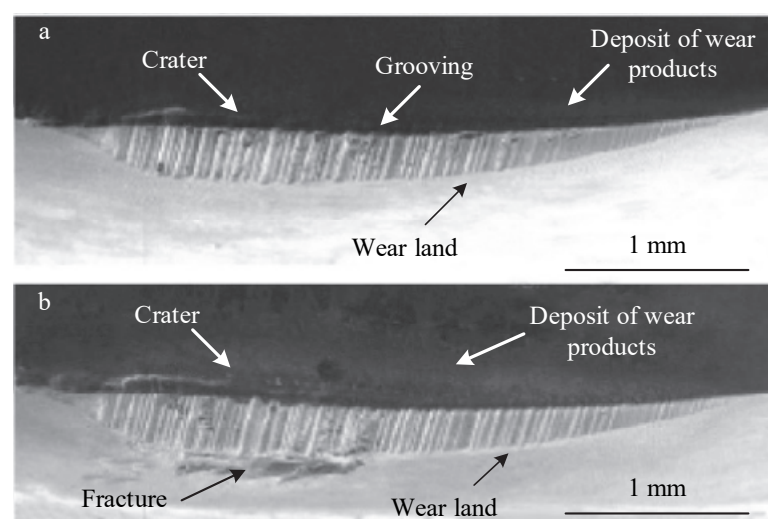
SEM micrographs of a worn CBN tool ((a) $v_c = 250$ m/min, $f = 0.1$ mm/rev; (b) $v_c = 350$ m/min, $f = 0.1$ mm/rev) [38].
